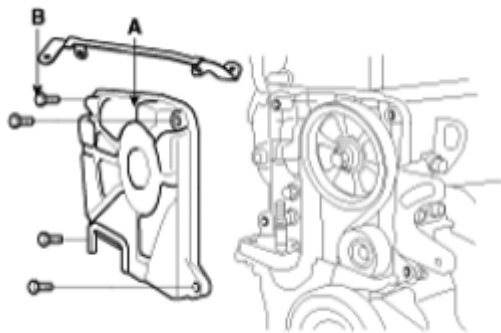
Identifying Bolts And Timing Belt Upper Cover
